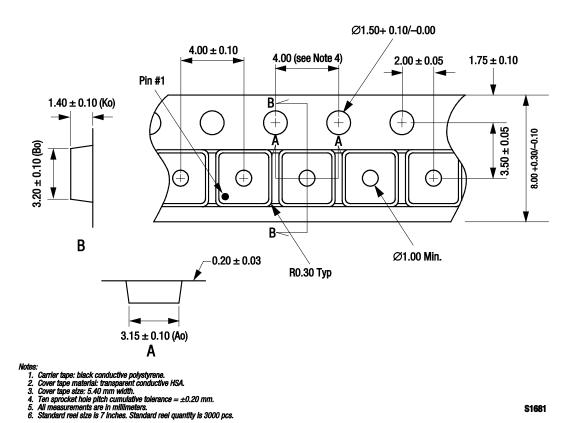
PD18-73/PD18-73LF Tape and Reel Dimensions
